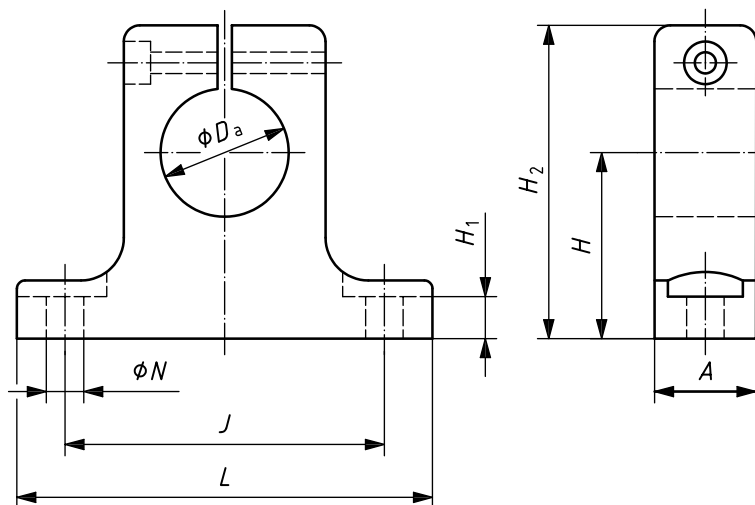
Flanged shaft support blocks for series 1 and 3 sleeve type linear ball bearings
